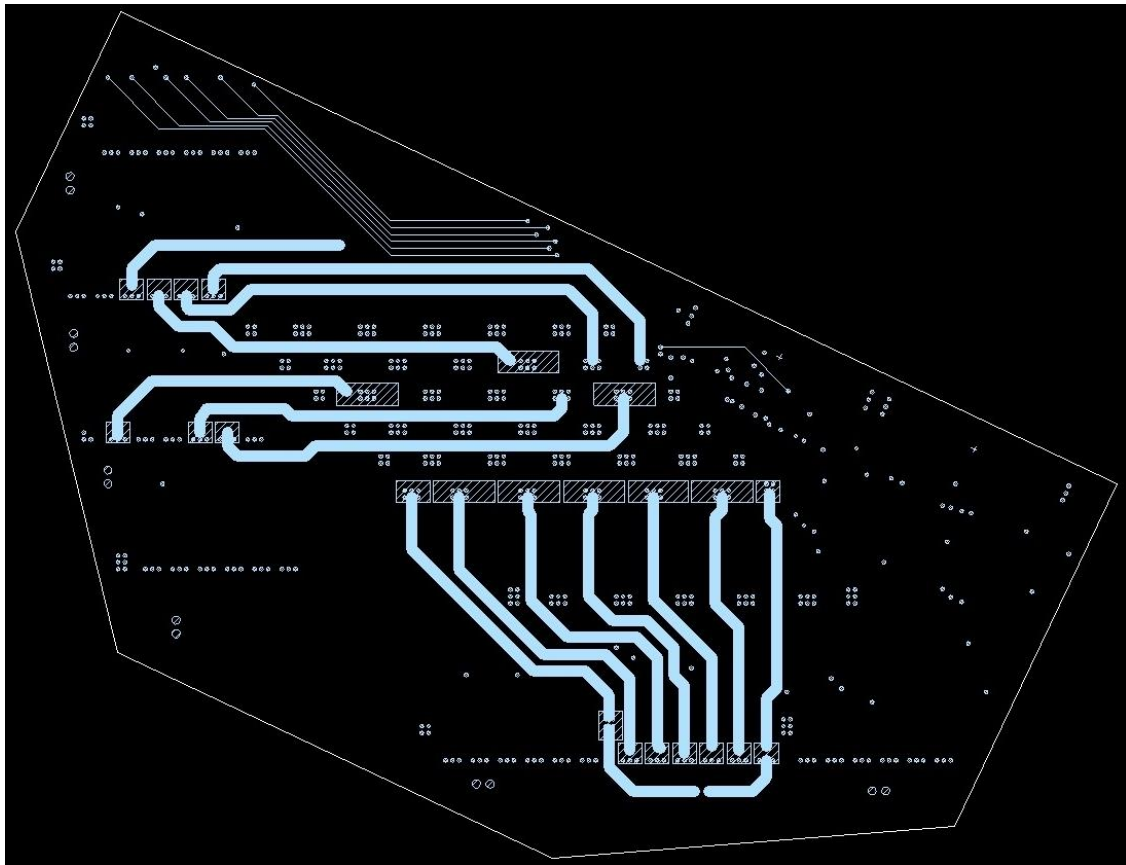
Board Pattern Diagram (Headlight Power Supply Board)
